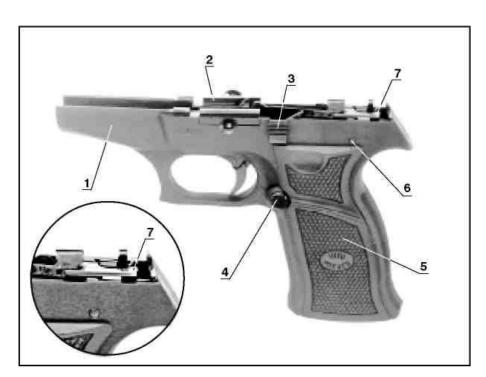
WIST 94 assembled receiver: 1 – receiver (frame); 2 – trigger mechanism; 3 – slide stop; 4 – magazine catch; 5 – left grip; 6 – rear insert pin; 7 – sear (integral part of the trigger bar)
